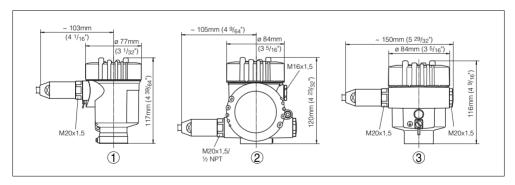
Housing versions in protection IP 66/IP 68, 1 bar (with integrated indicating and adjustment module the housing is 9 mm/0.4 in higher)
